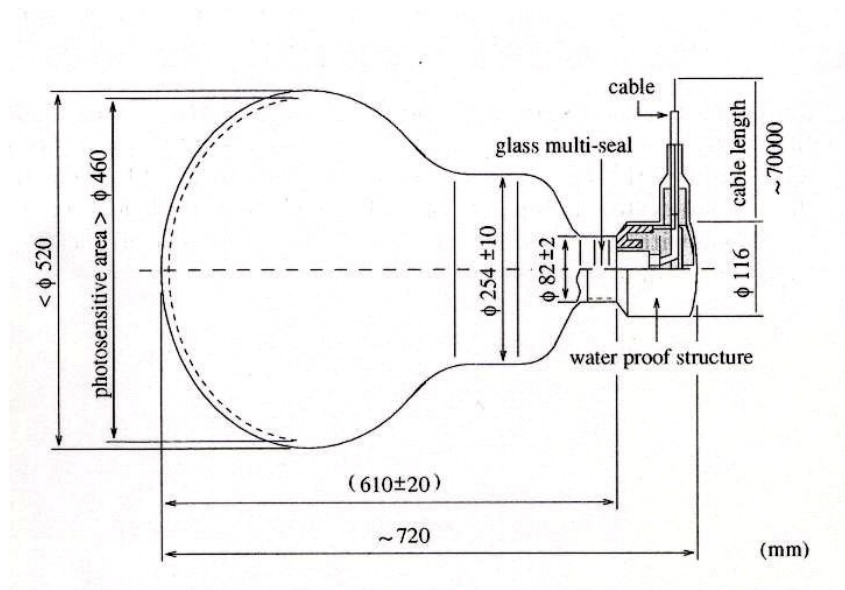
Technical drawing of the Inner Detector PMT [156].
